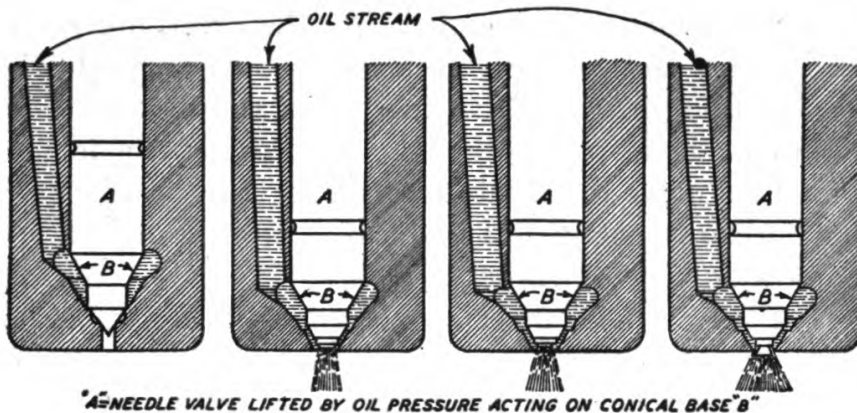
Pintle-Type Spray Valve, Showing Oil Cone Formed
